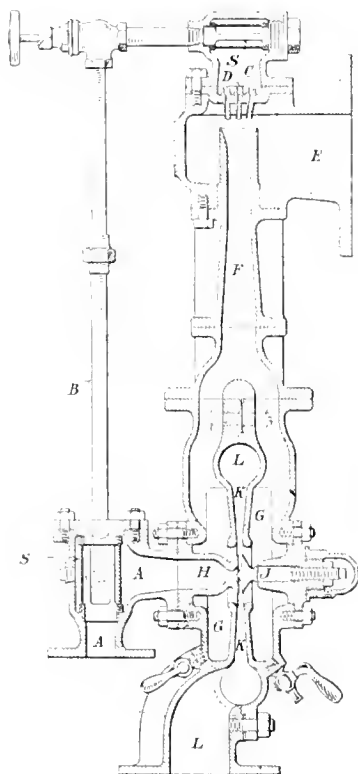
SECTIONAL VIEW OF RADOJET AIR PUMP
